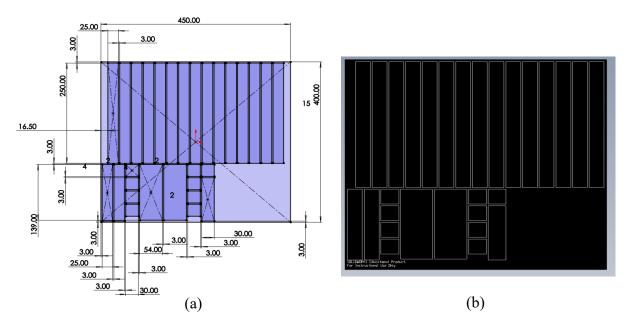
2D Solidworks drawing (a) and DXF file (b)
